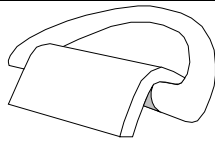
D-Ring (Lashing Eye) on Deck.
